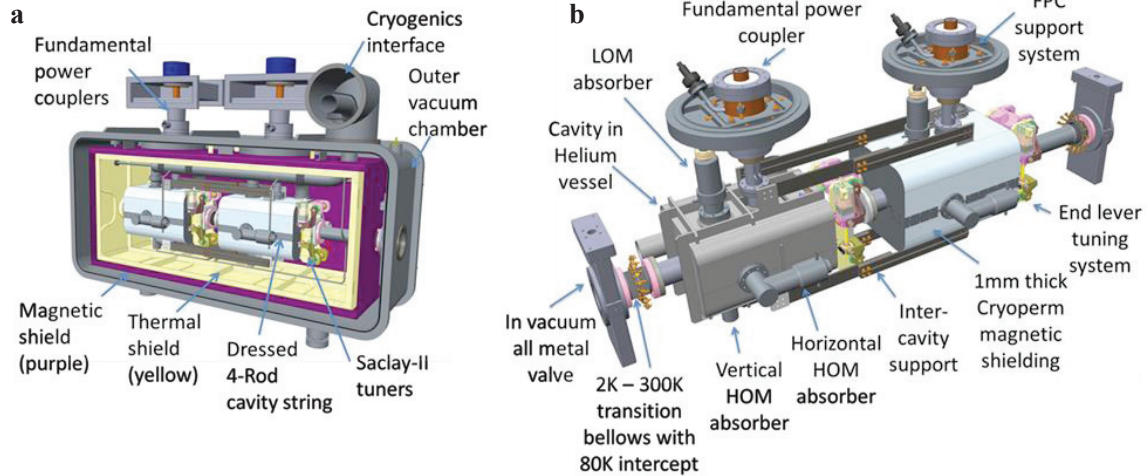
(a) Open access cryomodule for 4-Rod crab cavities and (b) Dressed 4-Rod cavity string
